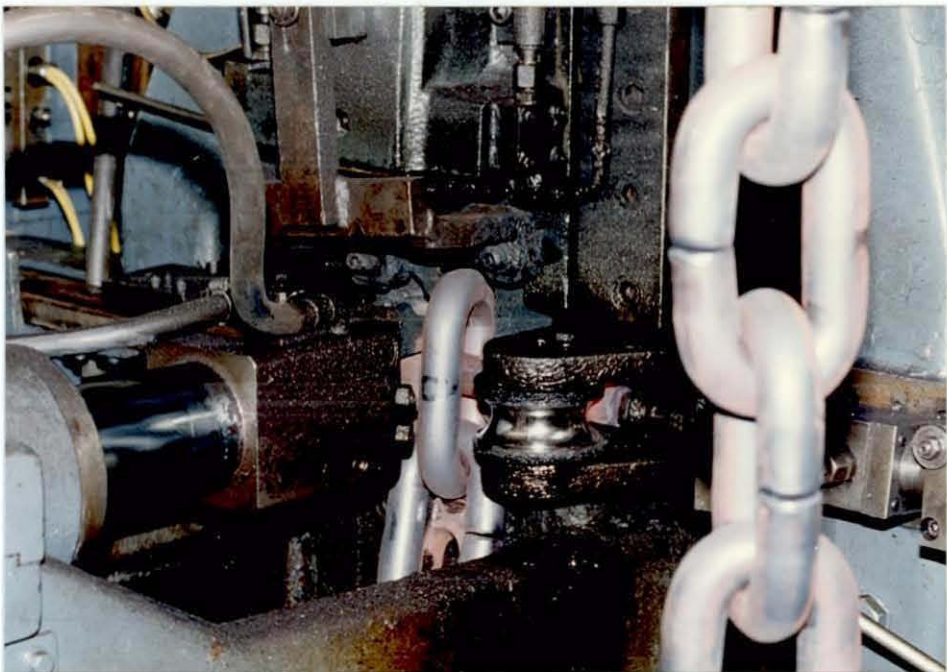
Hot forming of chain links over 20 mm diameter.
